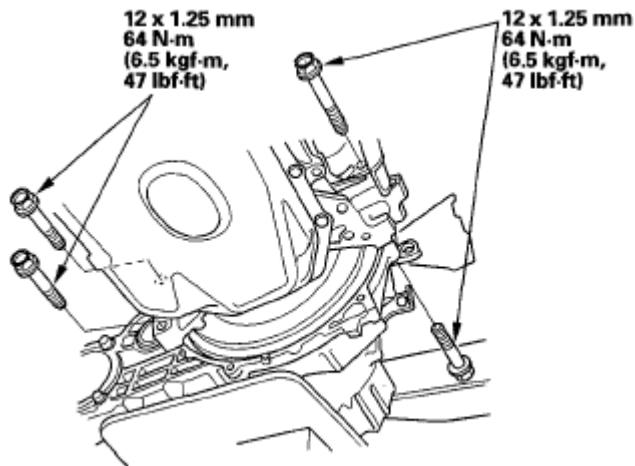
Identifying Lower Transmission Mounting Bolts With Torque Specifications
